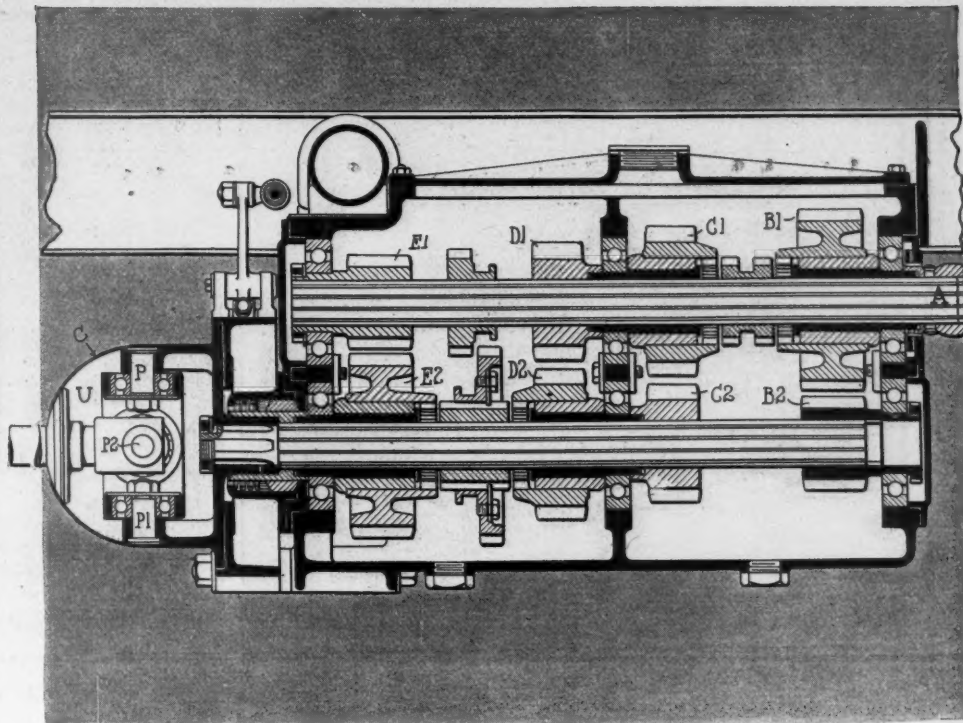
CHAIN-DRIVEN GEARBOX OF MAUDSLAY
